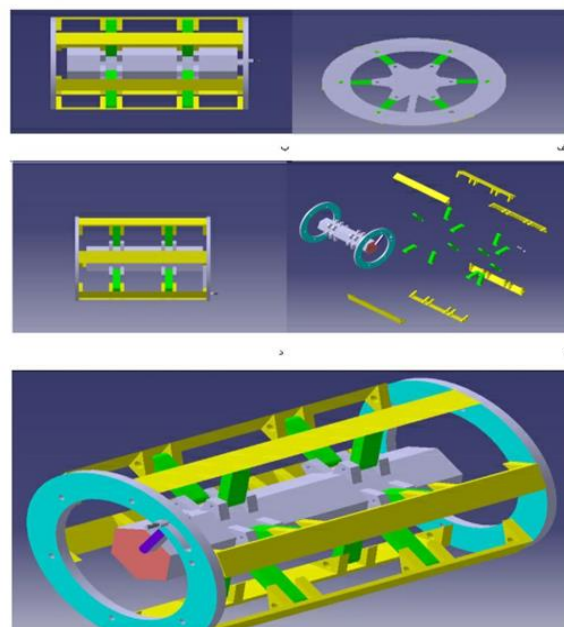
Image of the proposed mechanism to change the length of parts and reduce cutting energy: a- left view, b- opposite view, c- exploded view, d- general view
